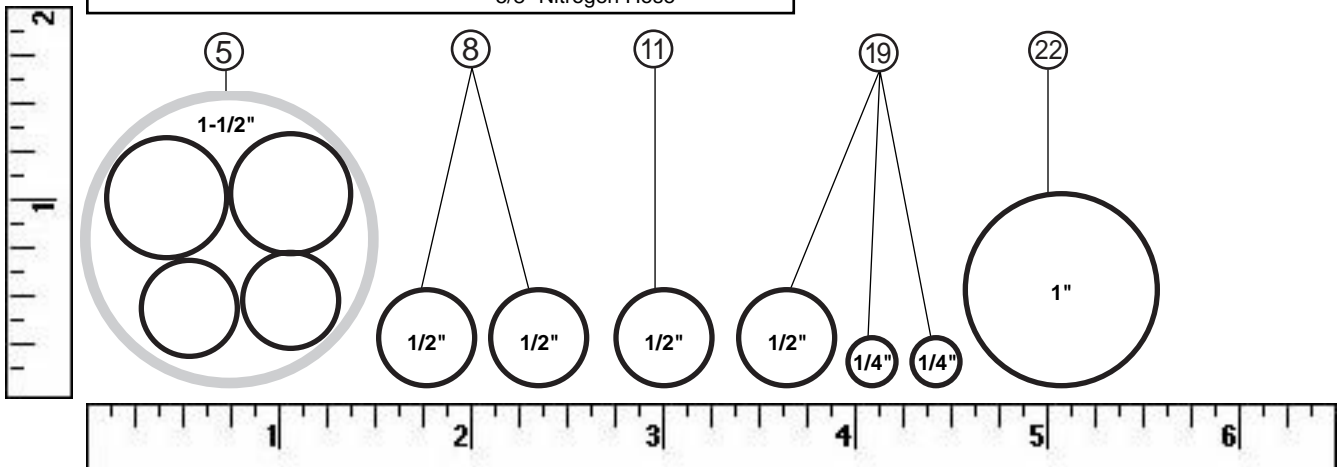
Cables / Hoses in Machine Cable/Hose Carrier
